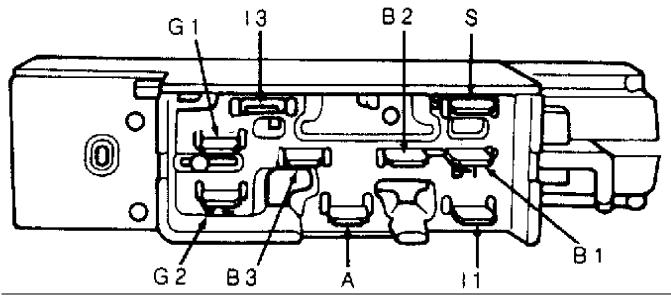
Locating Ignition Switch Terminals Courtesy of Chrysler Corp.
